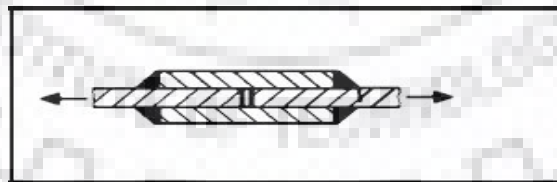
Transversely loaded lapped joint with side fillet welds given in IIW having FAT 50.
